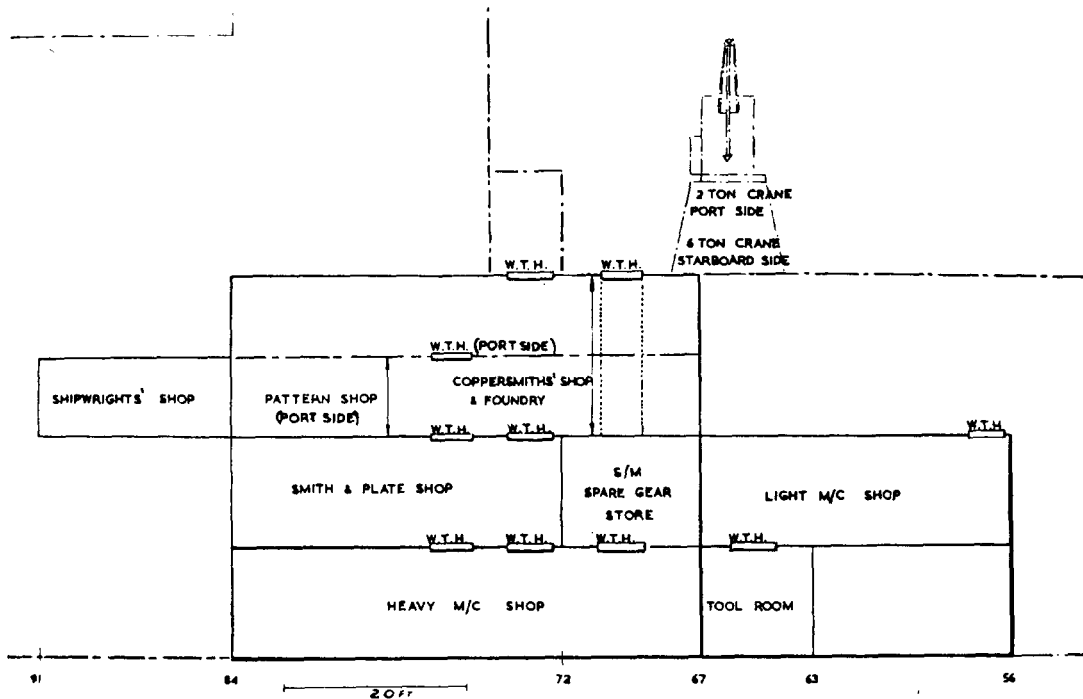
ELEVATION SHOWING GENERAL ARRANGEMENT OF WORKSHOPS
